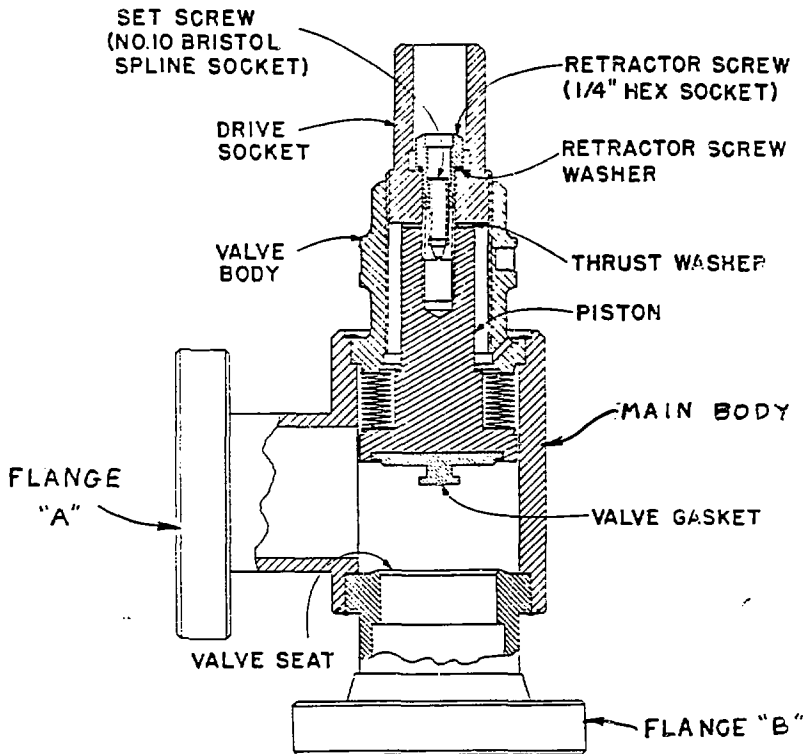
1 1/2 - INCH BAKEABLE VALVE
